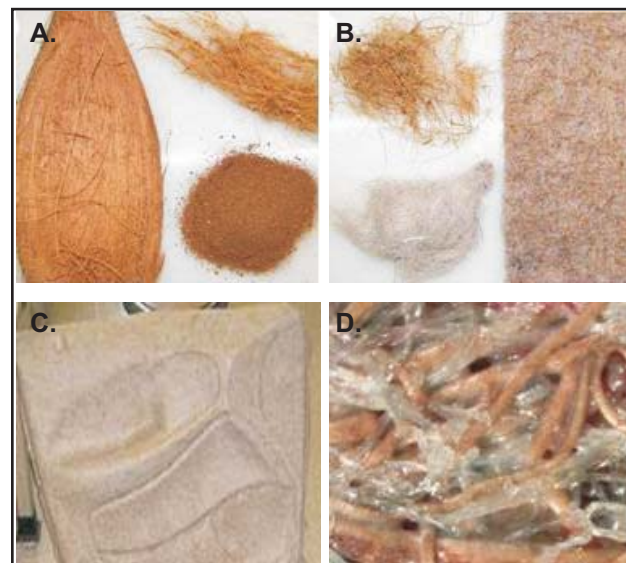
A. Coconut husk contains fiber and pith; B. Coconut fiber is blended with polypropylene fiber to make a felt; C. Automobile door panel made by heating felt and compression molding it; D. Felt after compression molding.
